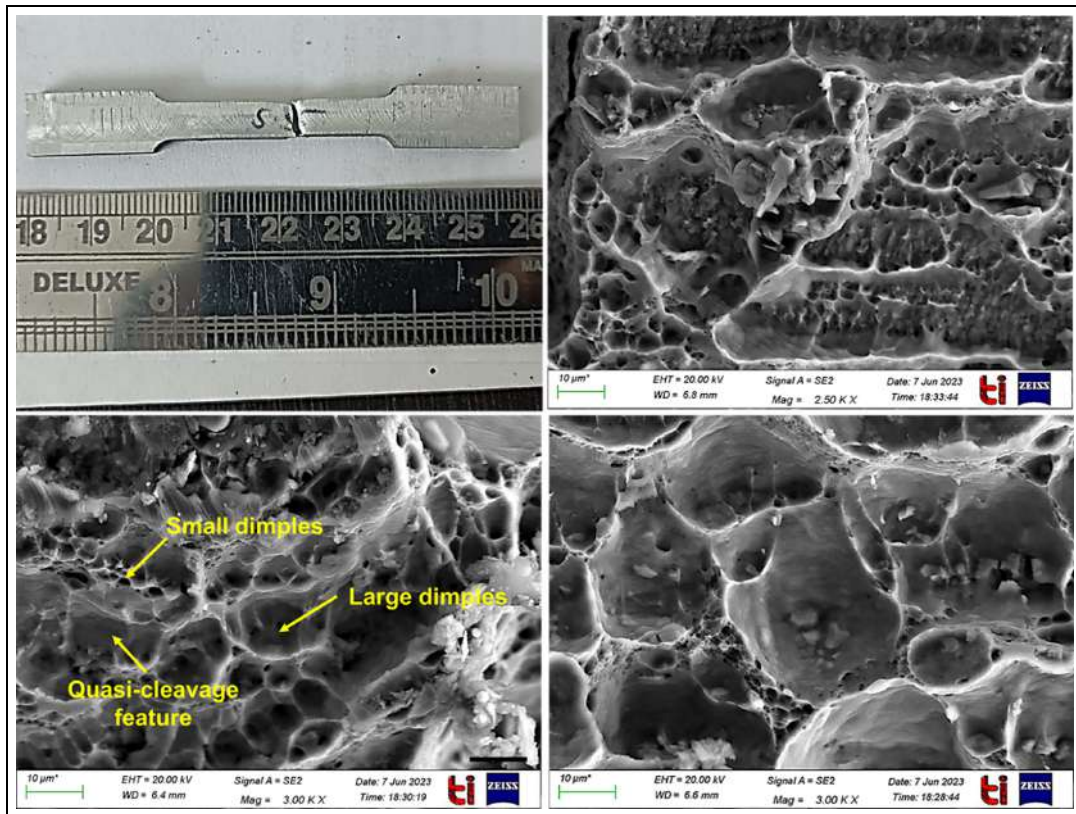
Represent the tensile fracture sample and FeSEM analysis of tensile fracture surface of DP9 FSP sample.
